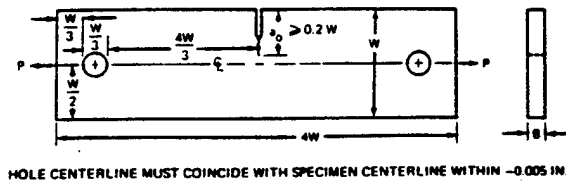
Single Edge Notch Tensile (SENT) Specimen.
